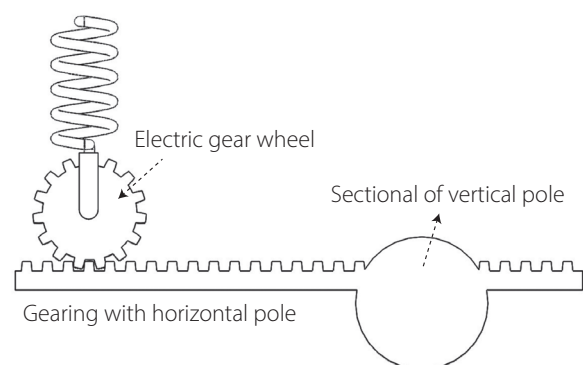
Fitting condition of the electric gear and the groove of the horizontal pole (cross-sectional view from above)
